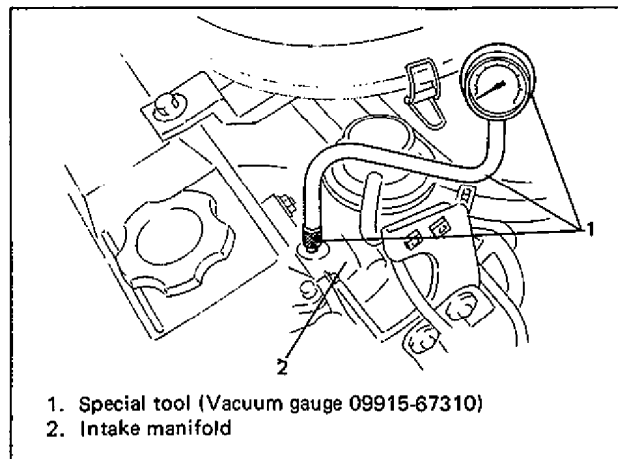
A-6-1 Installing Vacuum Gauge (for injector model with M/T)
